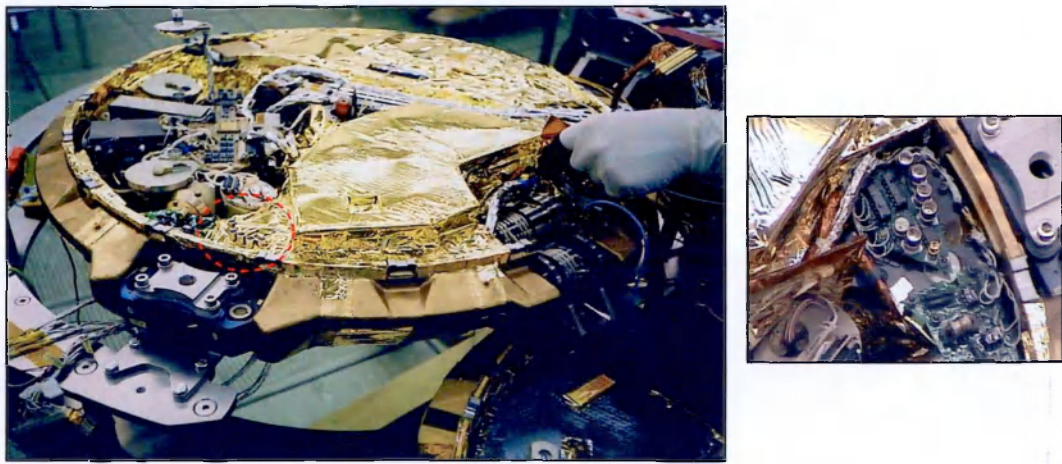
Electrical integration and final shroud covering of the UV sensor on Beagle 2.
